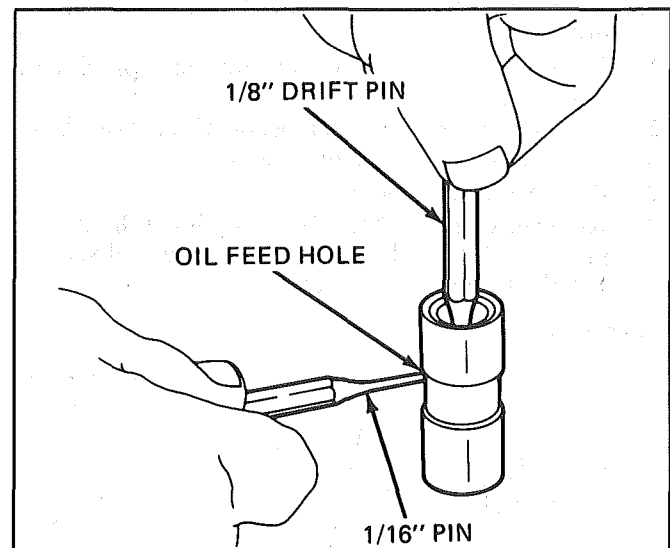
A3-14 Assembling Hydraulic Lifter Typical
